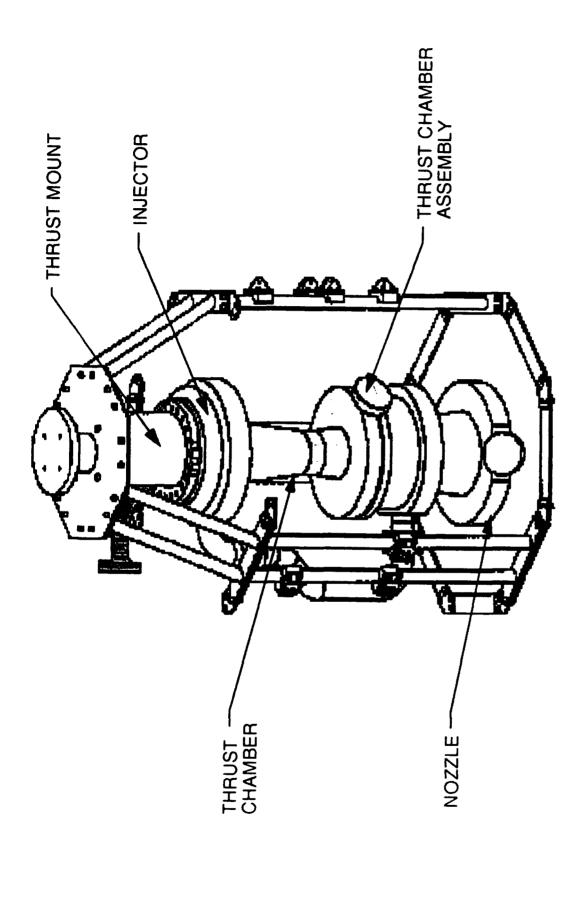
Thrust Chamber Assembly Installed in Partially Assembled Frame
